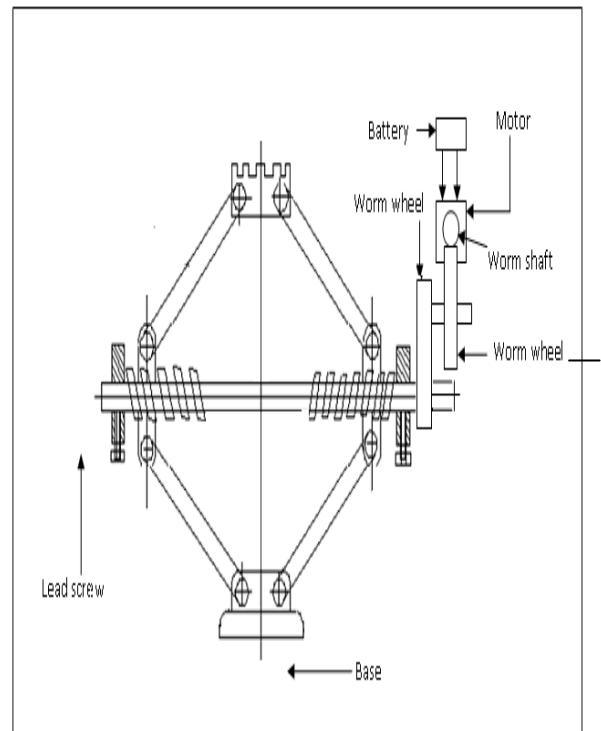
Construction of toggle jack with worm & worm wheel
